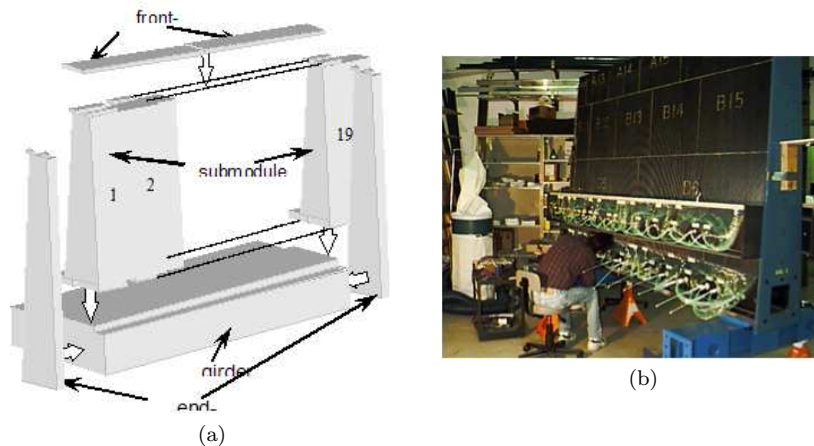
(a) A sketch of the assembly of submodules on the girder forming a module. (b) On the right is shown a partially completed extended barrel module with details of the fiber routing clearly seen.
